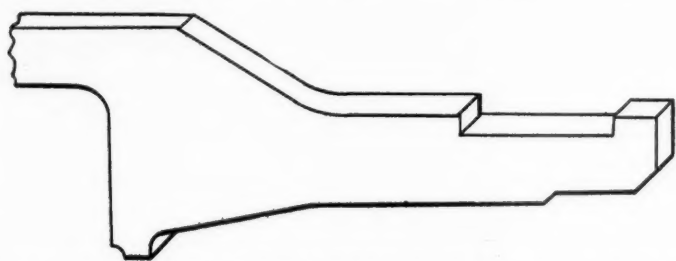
Type of Front End Which is Machined and Drilled Before Welding to the Frame.
